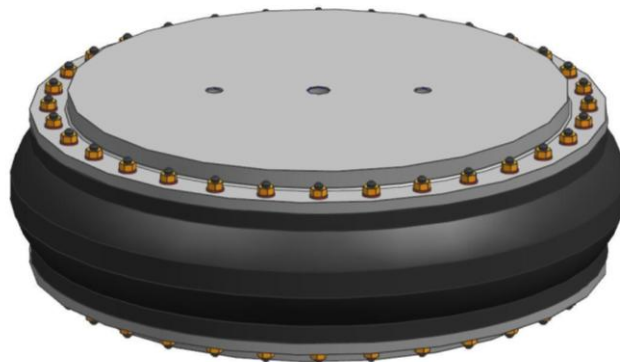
Complete assembly of the mounting system with air springs. (Långbacka 2012, p. 11).
